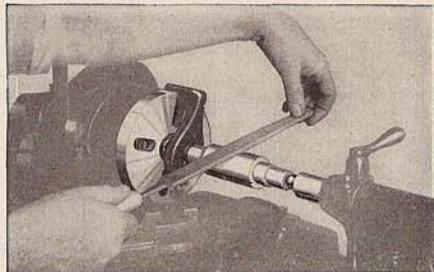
Lathe is Practical for Filing and Polishing Bushings, Shafts, Parts, etc.
